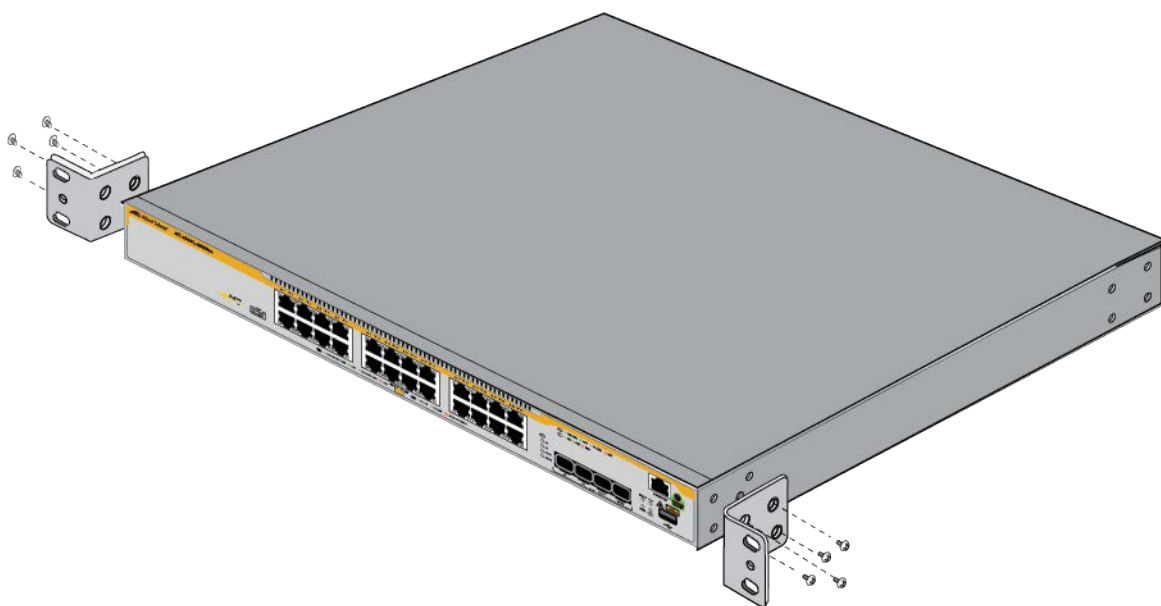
Attaching the Rack Mount Brackets for the x250-28XHm switch
